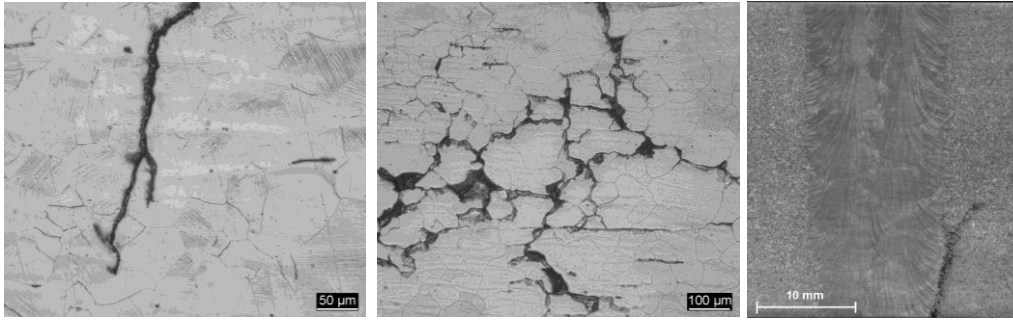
Etched macrographs of fatigue crack (left), intergranular stress corrosion crack in austenitic base material (middle) and in the HAZ of an austenitic weld (right).
